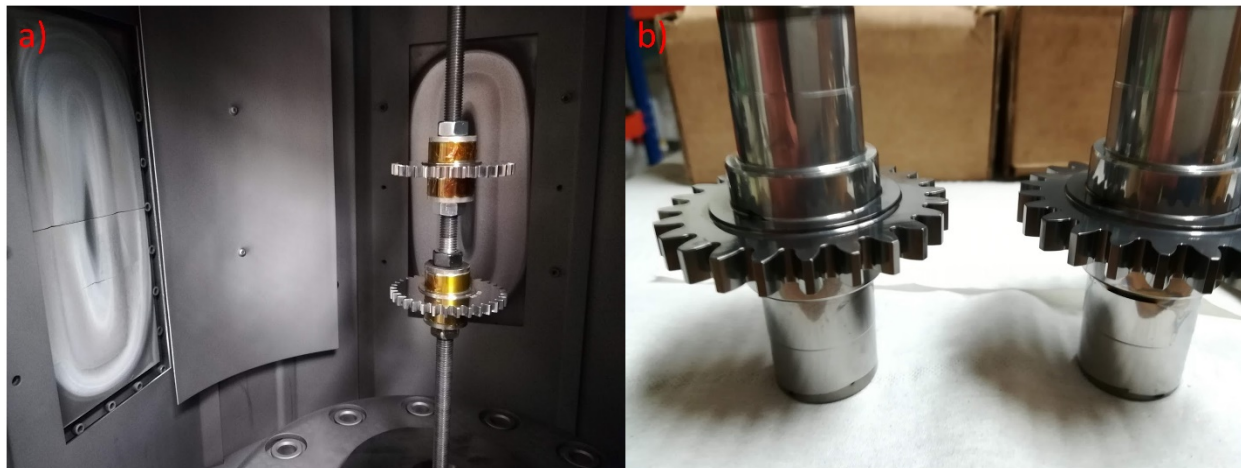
a) Placement of gears in the deposition chamber b) gears with the W-S-C coating
